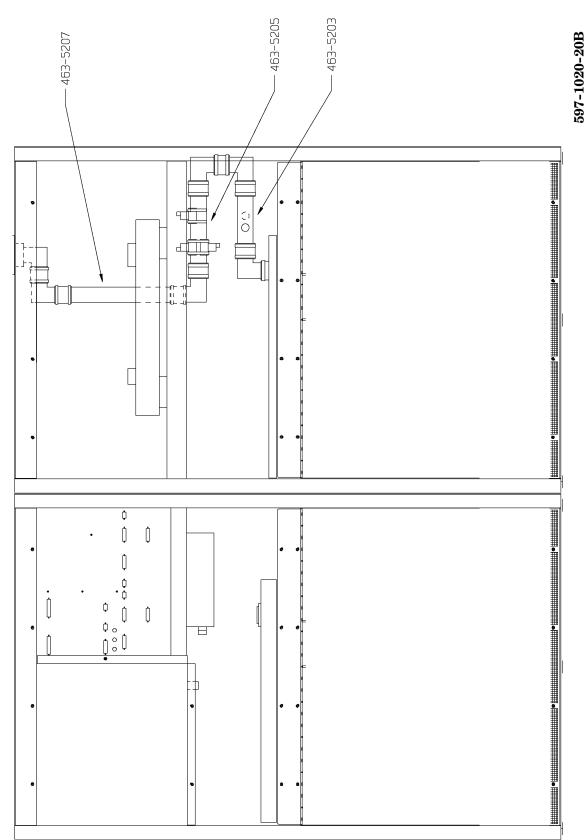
INSTRUCTIONS TO BYPASS CONTROL OR AUXILIARY CABINET 10 KW COMBINER (SHEET 4 OF 4)
